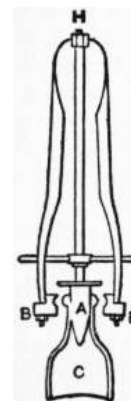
Tool for moulding the inside and outside of the neck of a bottle.
